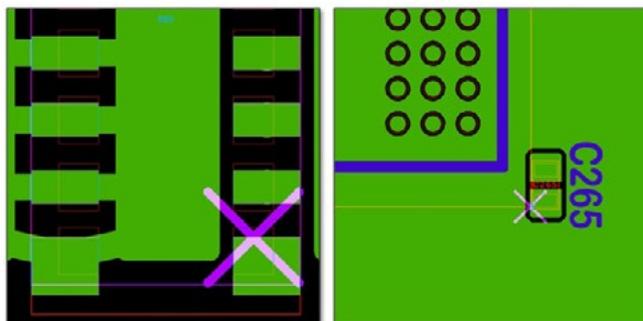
Two DFA checks: pin-to-pad analysis (left), and component-spacing analysis (right).
